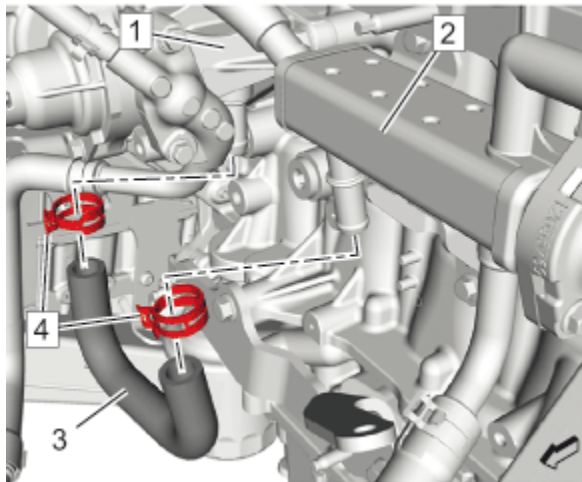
Exhaust Gas Recirculation Cooler Water Bypass Outlet Hose
